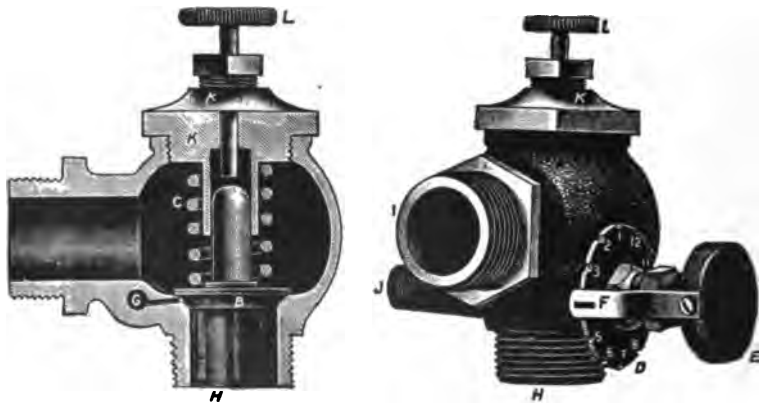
The James Valve. B, fuel inlet valve; C, spring controlling B; D is the scale dial showing proportions of air and gasoline; E, the wheel controlling gasoline valve; F, clip or top for holding E in position; G, gasoline supply tube; H, air inlet; I, entrance to cylinder; J, entrance for gasoline; K, cover of valve chamber; L, wheel and spindle controlling tension of spring, C.
